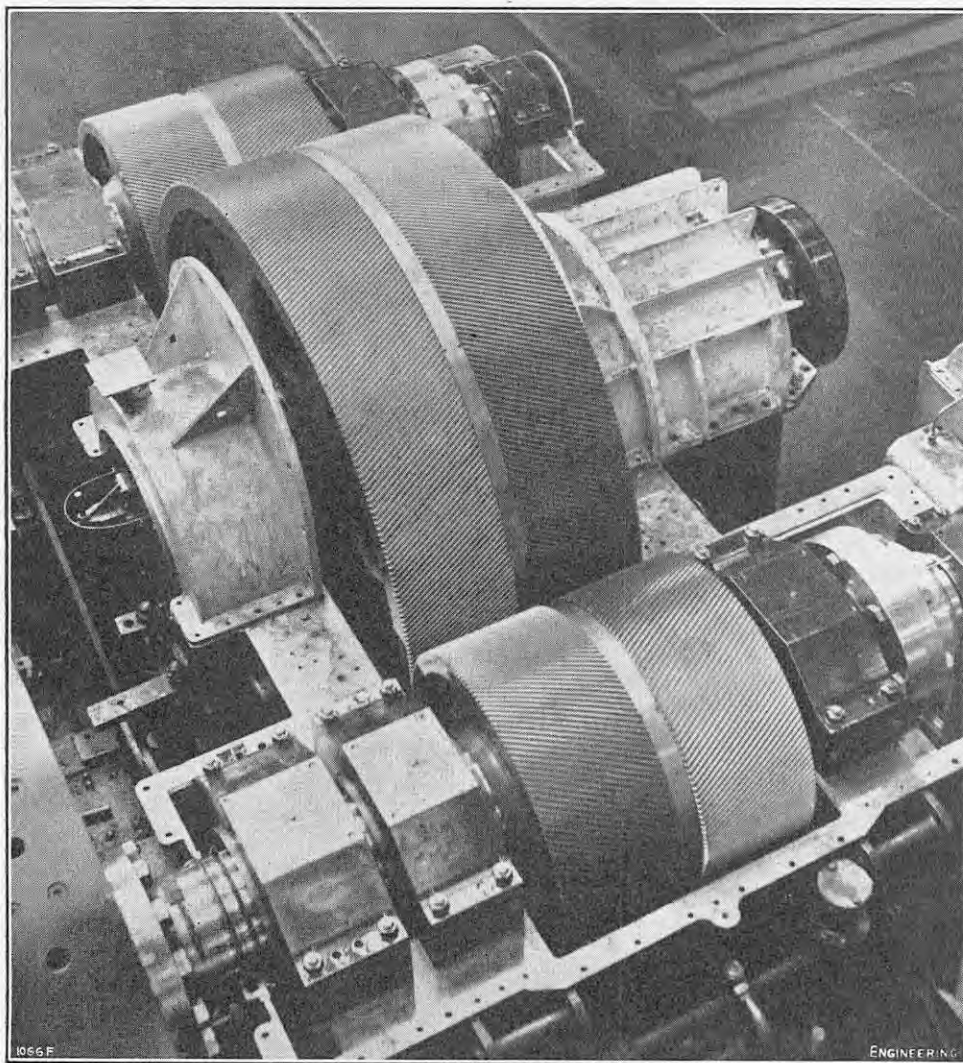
GEARBOX WITH TOP HALF-CASING REMOVED.
